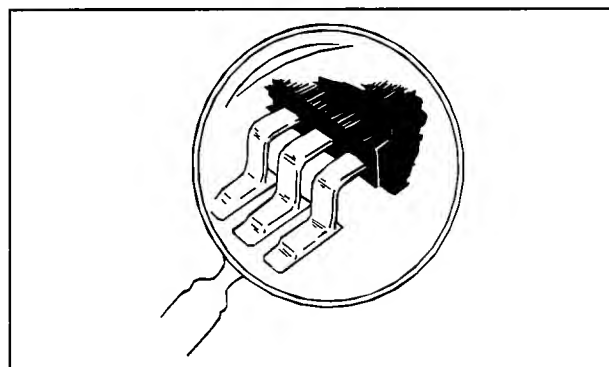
Use a strong magnifying glas to make sure there are no short/circuits or unsoldered leads.
